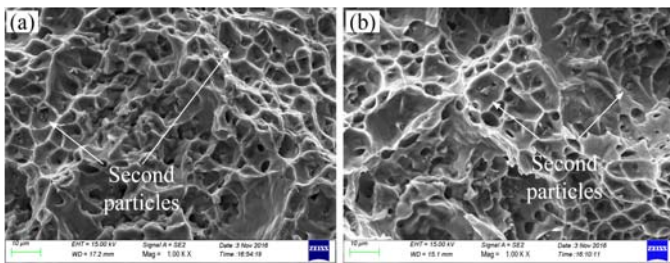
Final fracture regions of (a) 70° joint fracturing at FZ edge and (b) 50° joint fracturing near FZ center
